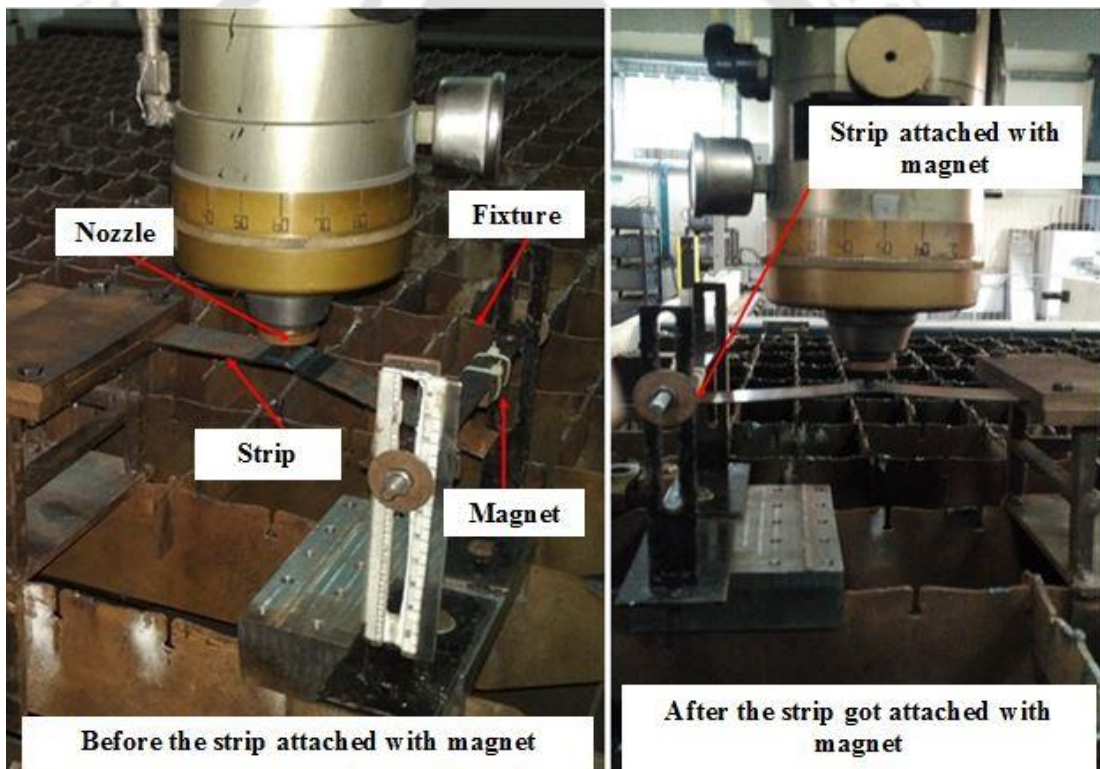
Photograph of the experimental setup before and after attaching the work-strip with magnet
